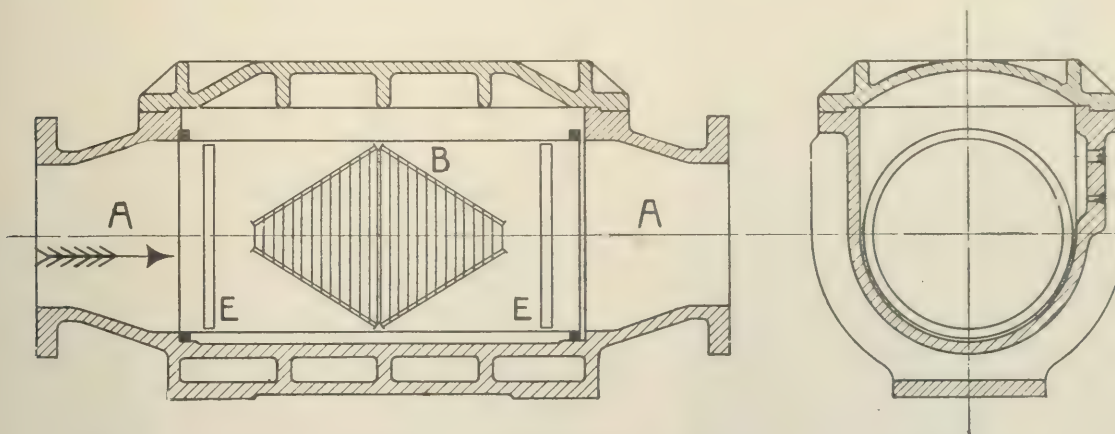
Sectional view of meter casing showing heater (B) and thermometers (E).
